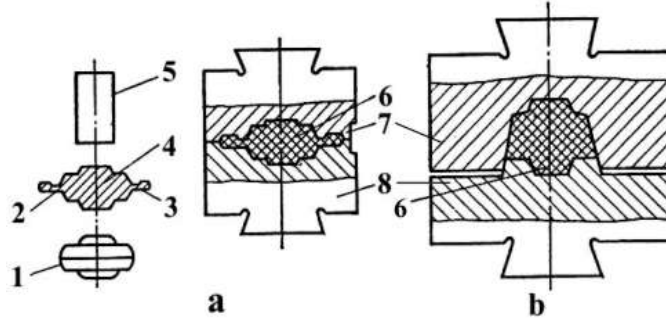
Die forging process in open (a) and closed (b) dies: 1 – forging; 4, 6 – forging with flashes 2 and 3; 5 – billet for forging; 7, 8 – parts of the die; b: 1, 2 – parts of the die
